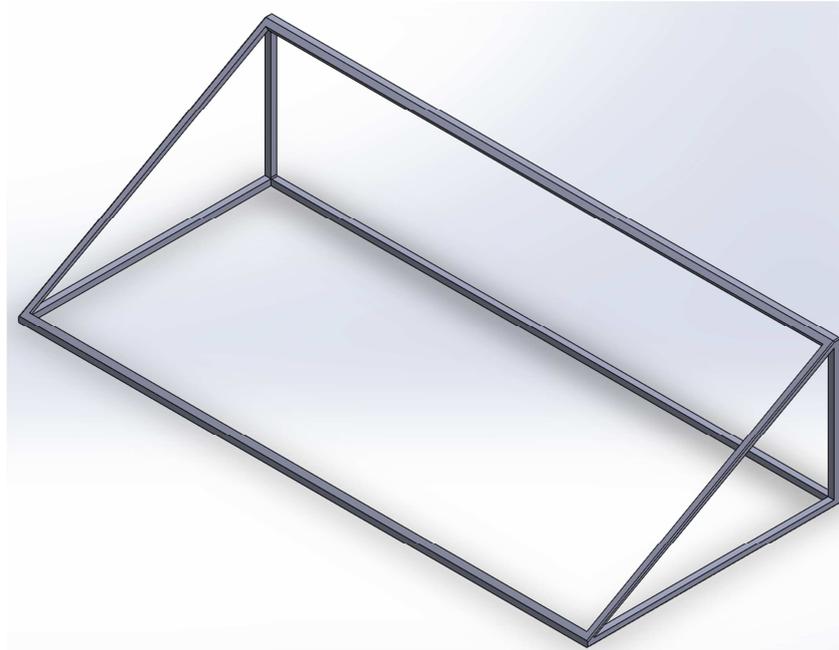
Final design of solar panel frame mount. Aluminum frame consists of 1/4 inch aluminum square bars welded together. 1/16 inch aluminum sheet metal will be used to secure the solar panel to a flat base. The sheet metal will be spot welded onto the frame before inserting the solar panel.
